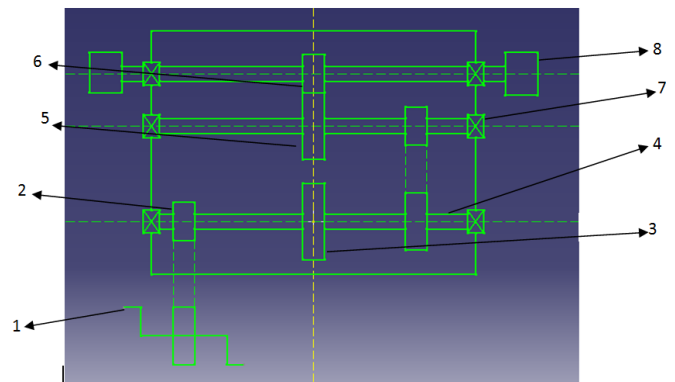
Schematic arrangement sugar cane sprout cutter machine
